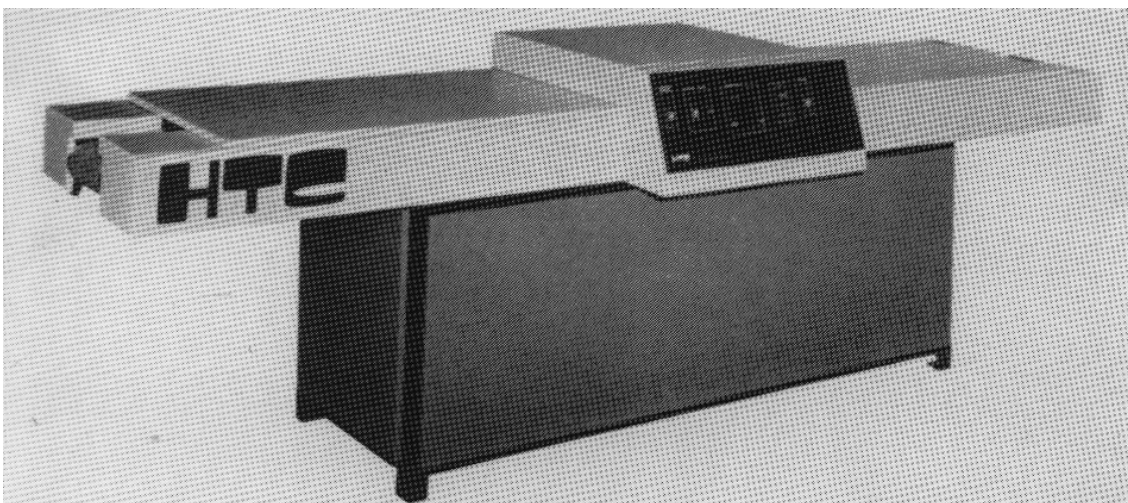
b): Industrial in-line vapour phase soldering machine.
